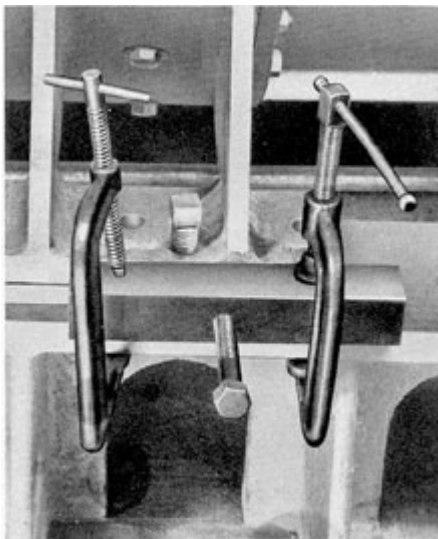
Using portable block and jack screw to adjust generator body for proper lateral alignment.
